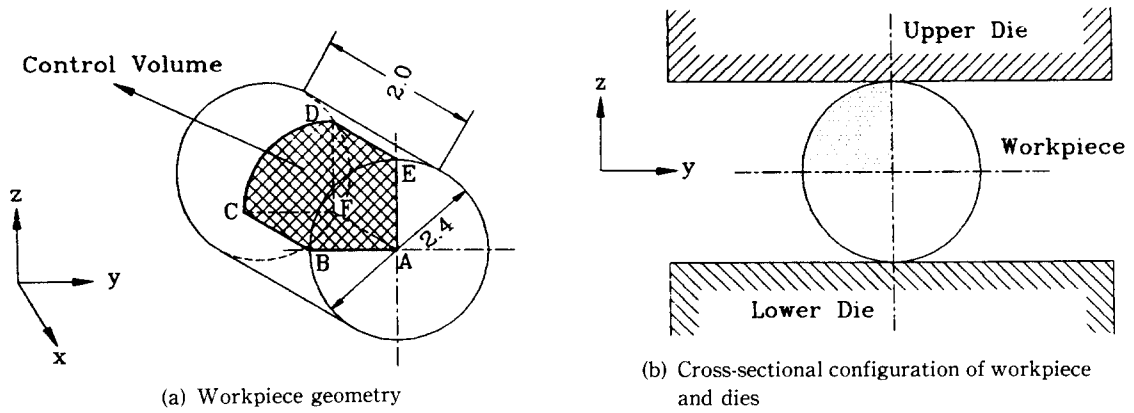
Geometrical configuration of cylindrical workpiece side pressing process
